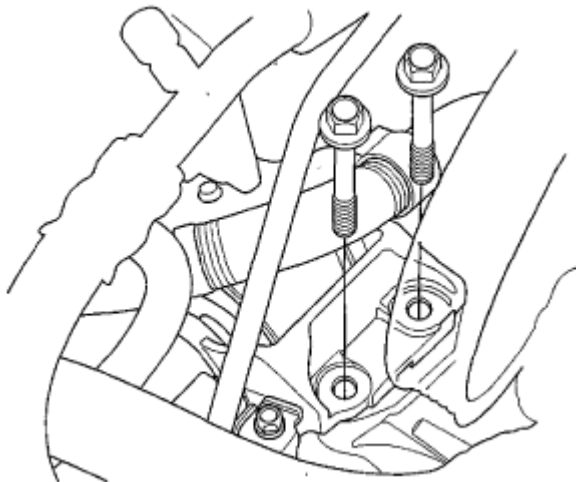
Identifying Side Engine Mount Bracket With Mounting Bolts
